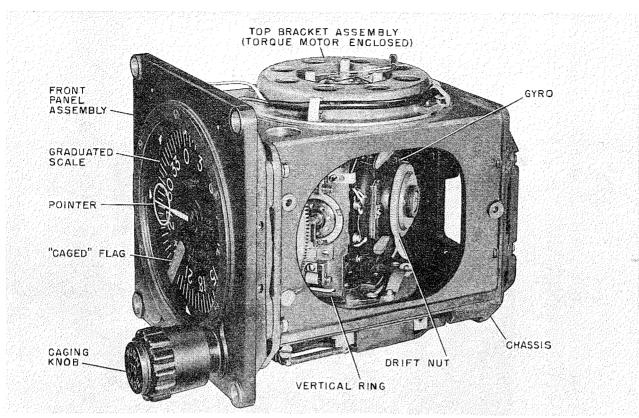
A - Type C-5 Directional Gyro Indicator - Right Internal View
